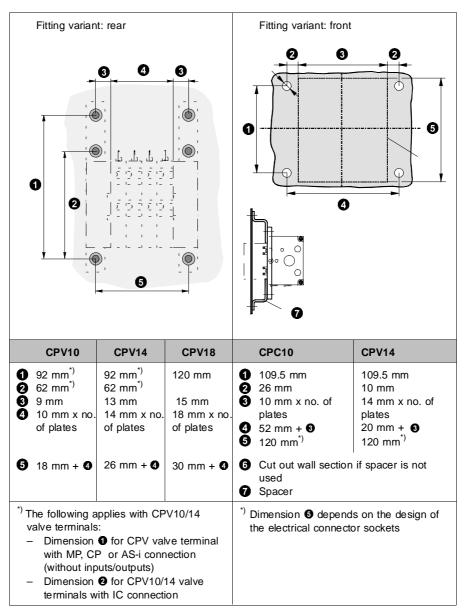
/3: Dimensions for fastening holes/cutout wall section
